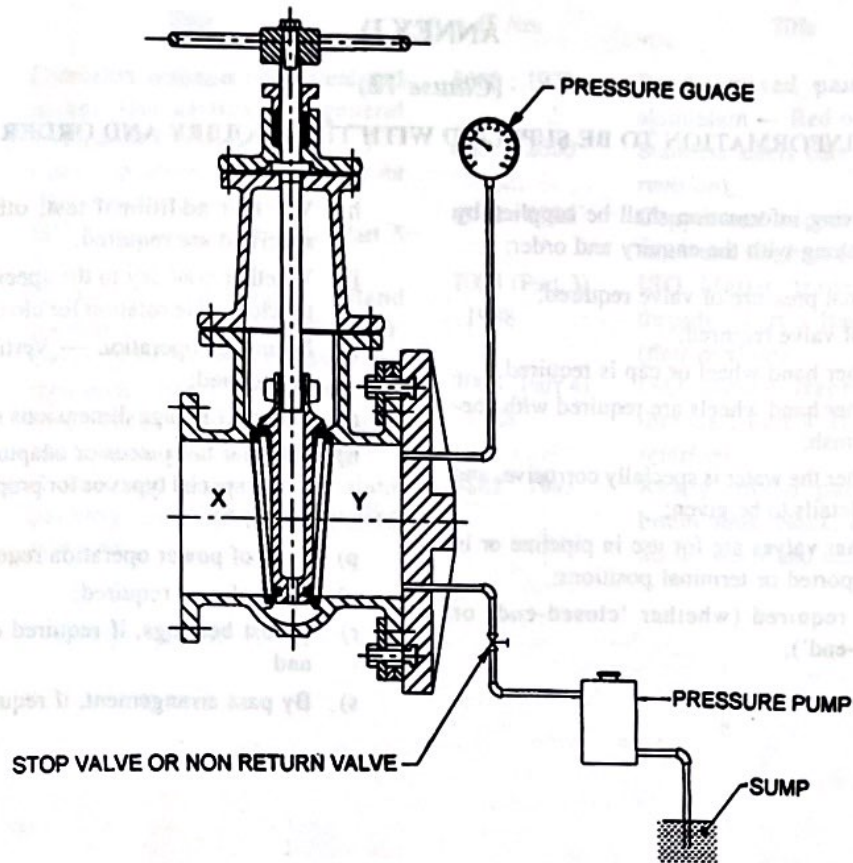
TYPICAL VALVE TESTING ARRANGEMENT FOR OPEN-END TEST
